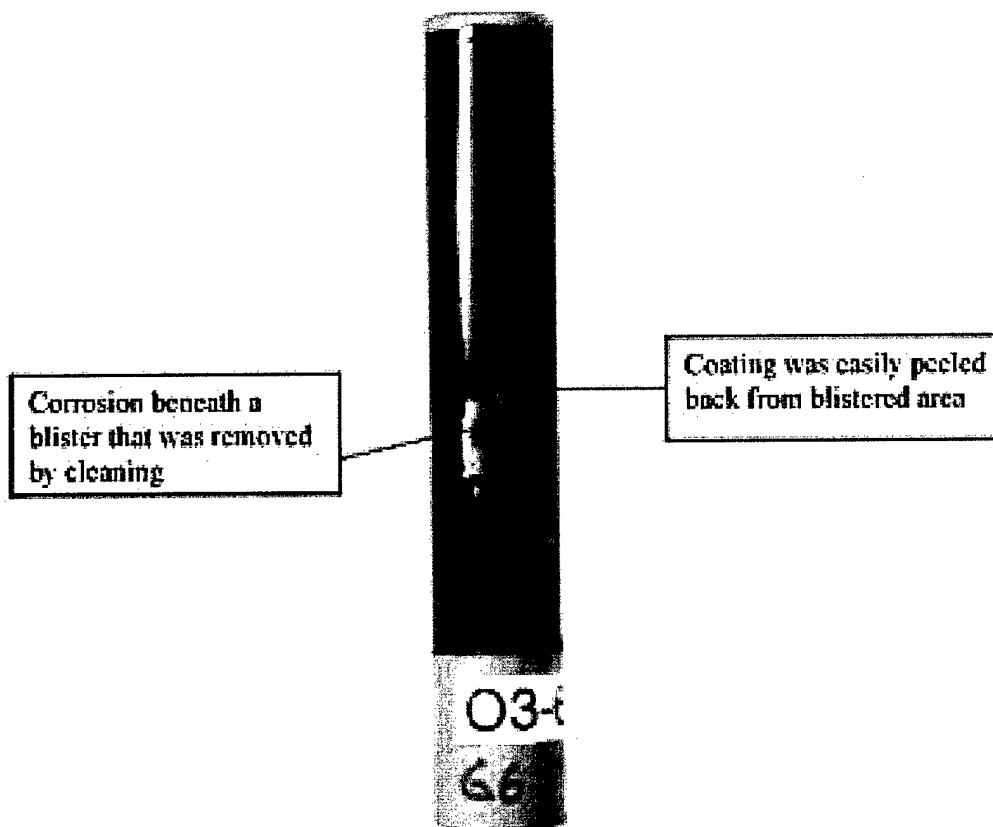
0.003"-thick HVOF WC-Co Coating on 4340 Steel with Sealer After Blister has been Removed
